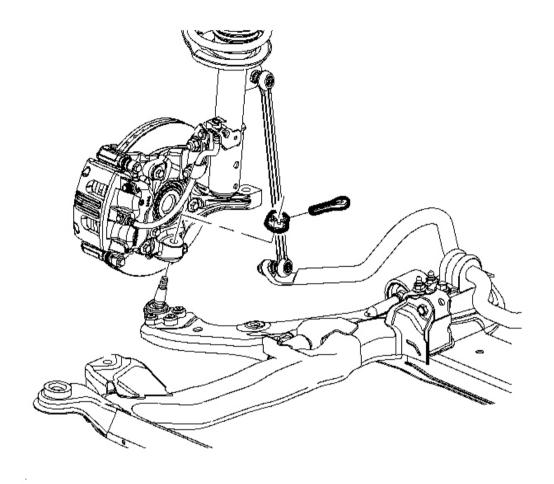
Lower Ball Joint Cotter Pin, Ball Stud & Nut Courtesy of GENERAL MOTORS CORP.
